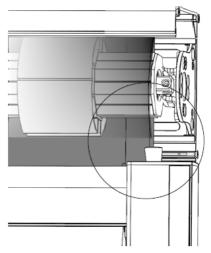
Idle end and retainment pins can be reassembled once the bottom rail passes the top end cap. (Hbox end cap hidden)
